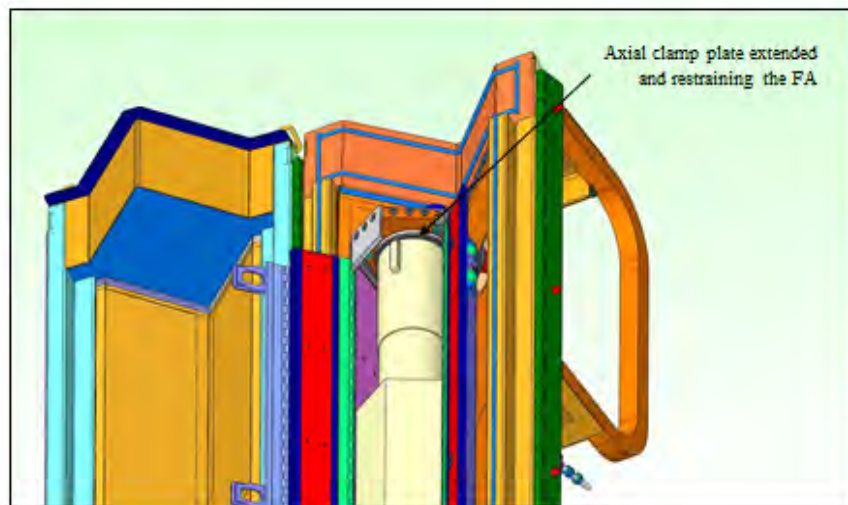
VVER Fuel Assembly Installed - Top Nozzle Region
